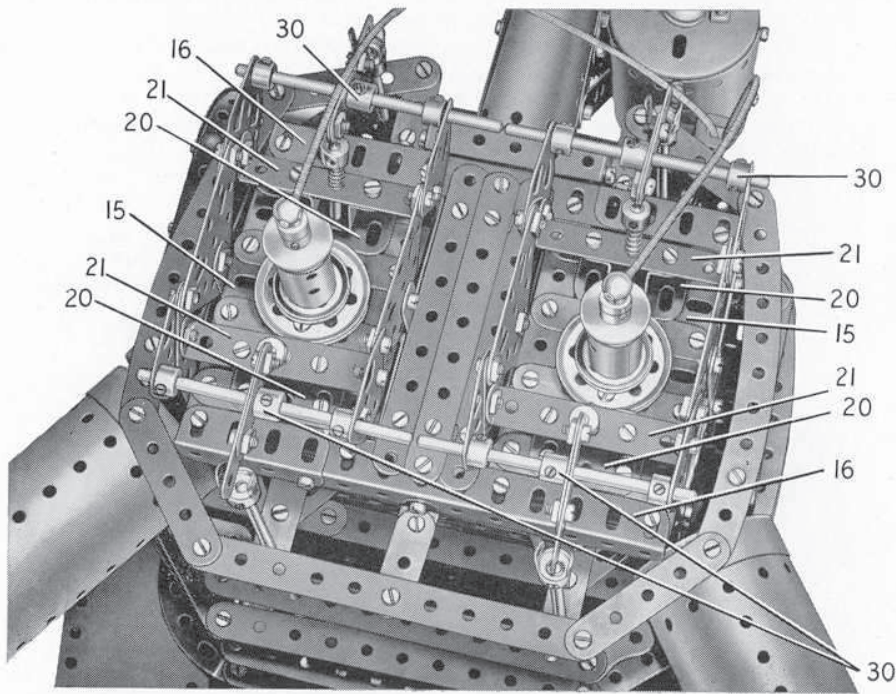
A close-up view of the cylinder block head showing the valves, sparking plugs, etc.
